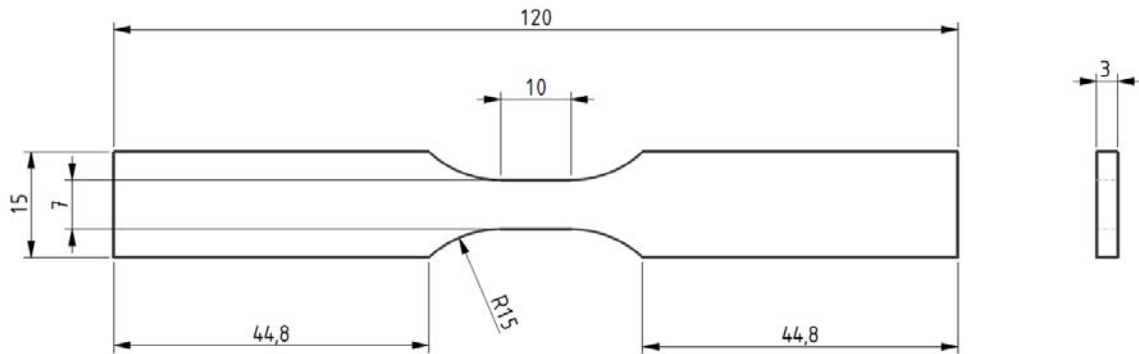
2D technical drawing of the plain specimens that have been used for the fatigue tests.
